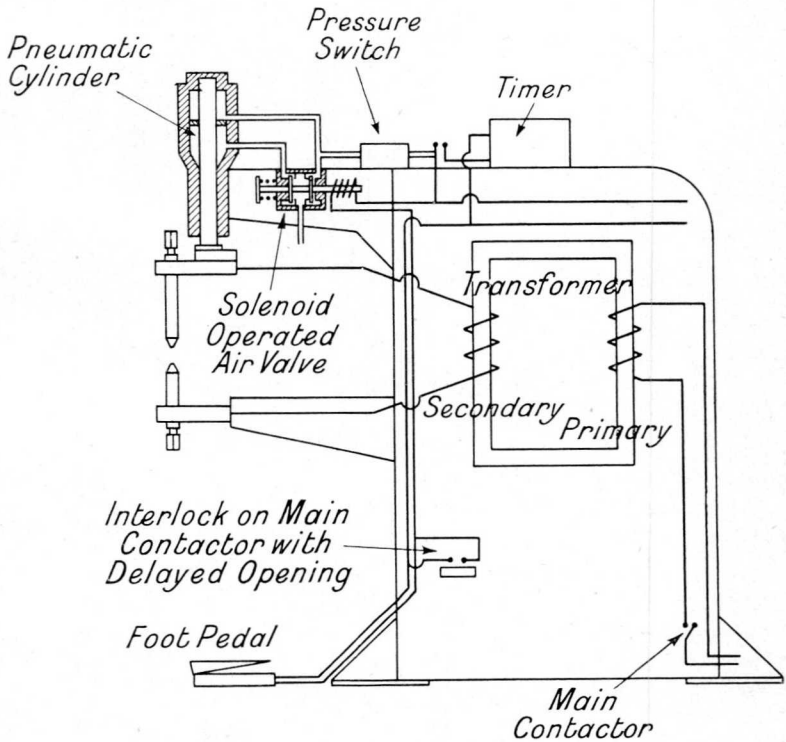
Diagram showing layout of a pneumatic spot welder.
